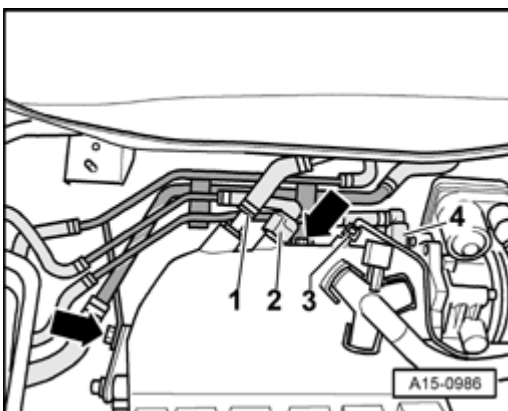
Disconnecting Vacuum Hoses At Rear Of Intake Manifold
